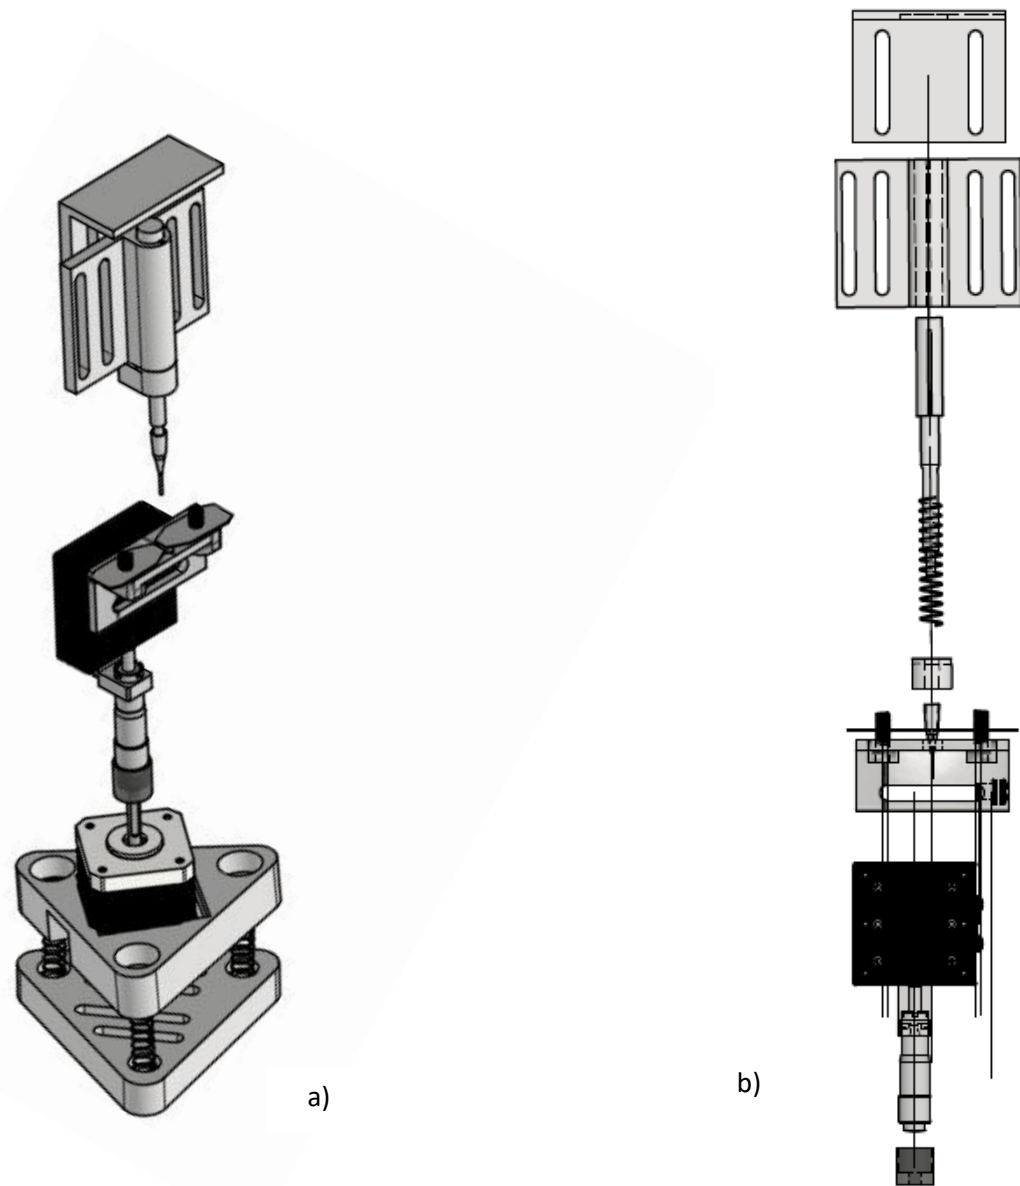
a) Final setup of the measuring system; b) exploded view of the measuring system
